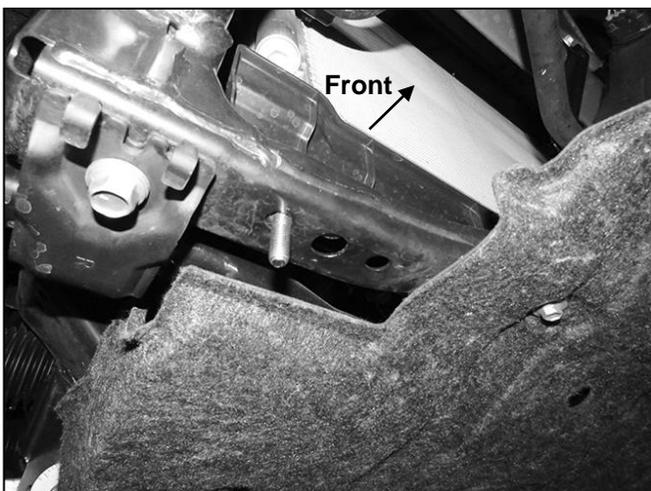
Reuse the factory hardware to attach the Passenger/Right Side Mounting Bracket
